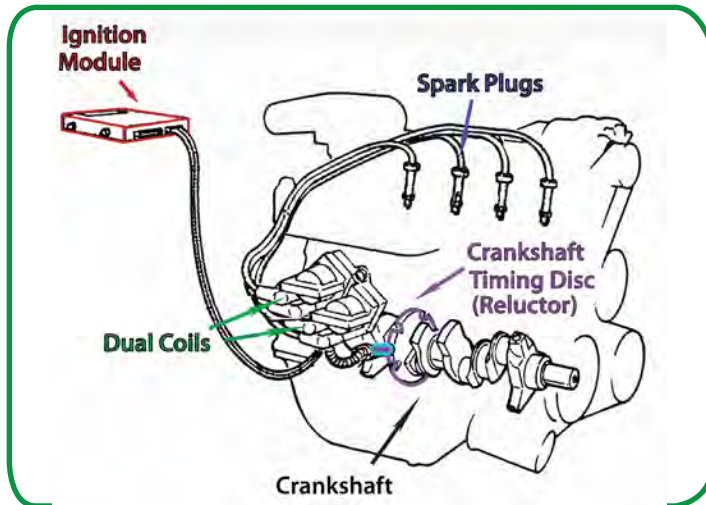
Distributorless ignition system using a magnetic crankshaft position sensor (CKP).
